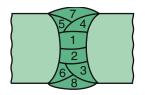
A deep weld showing the buildup sequence of eight individual weld beads.
